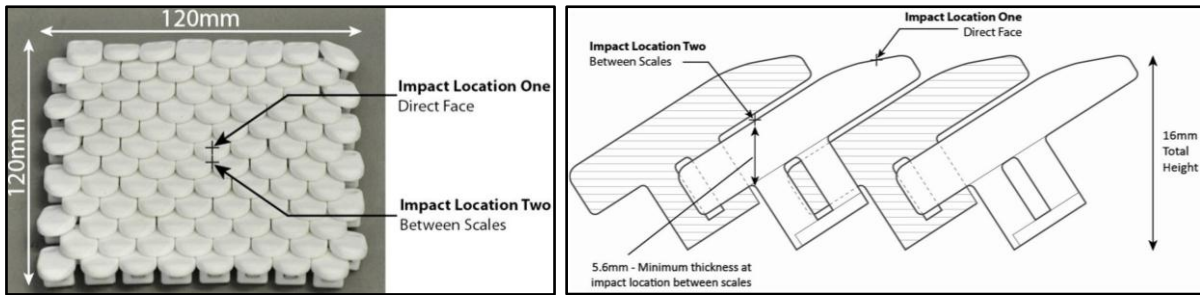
Articulated test sample strike locations (L) and section view showing minimum material thickness (R)
